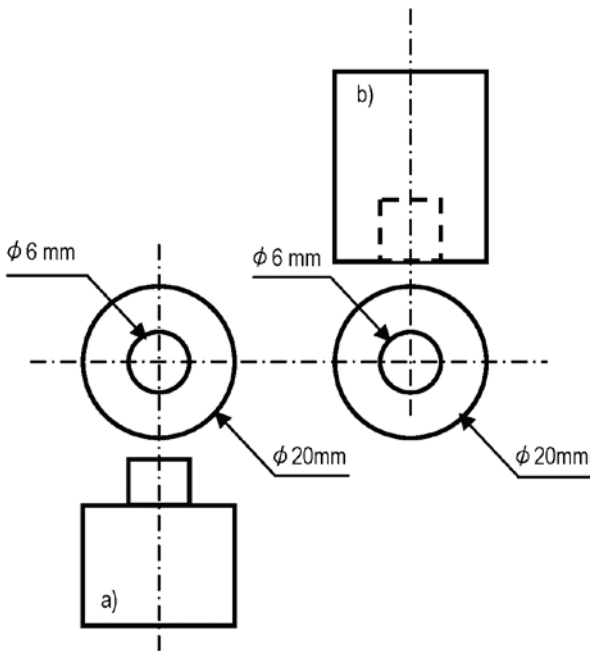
Dimension of bonding test specimens. a) TiAl alloy. b) SCM435H steel.
